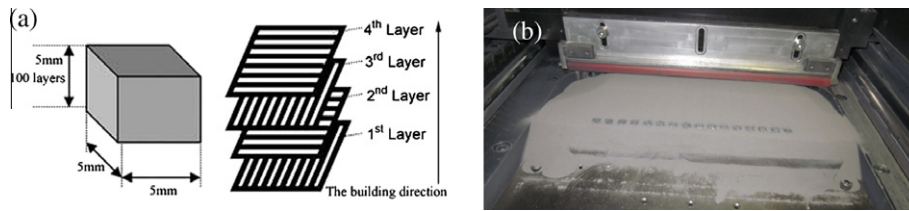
(a) Layer cross-hatching technique and (b) photographs showing real-time selective laser melting process.
